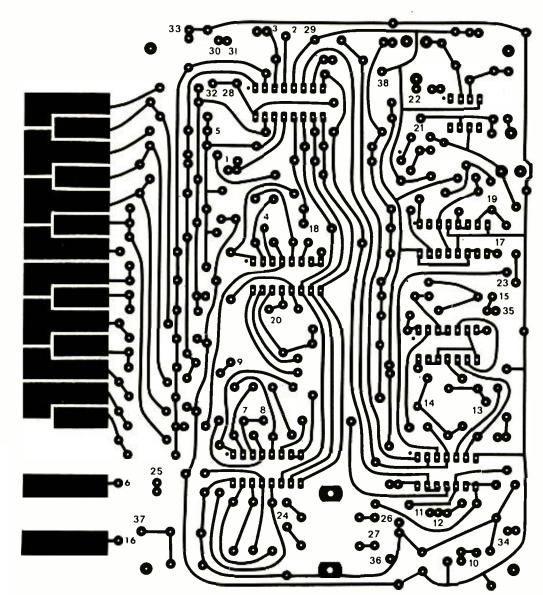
Etching and drilling guide for printed circuit board is at right; component layout on opposite page. Table below layout gives connections to numbered points on the pc board.
